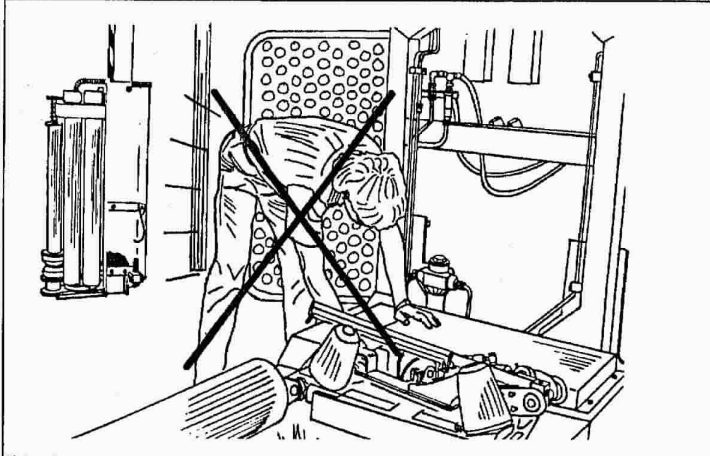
BEWARE OF MOVING PARTS WHEN TESTING THE MACHINE.
